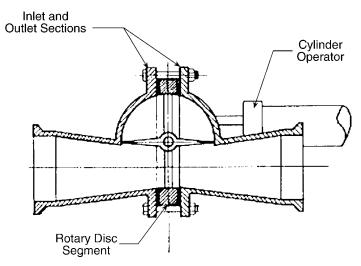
Rotary Disc Sluice Valve Courtesy of United Conveyor Corp.
